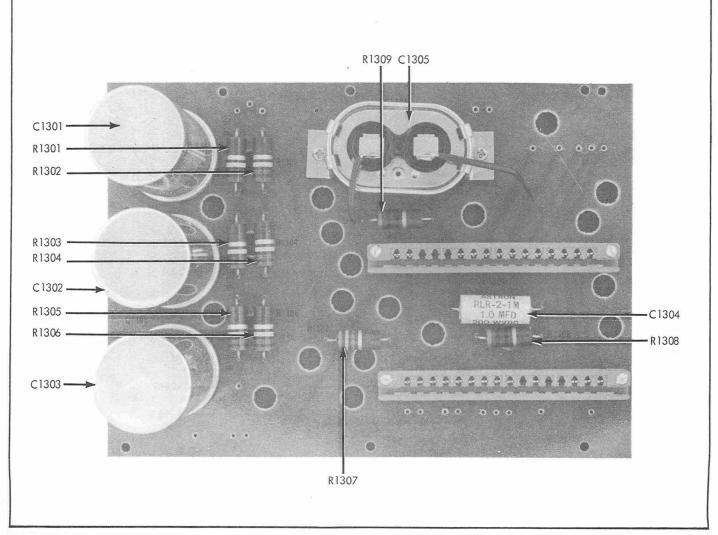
REAR MOTHER BOARD ASSEMBLY
